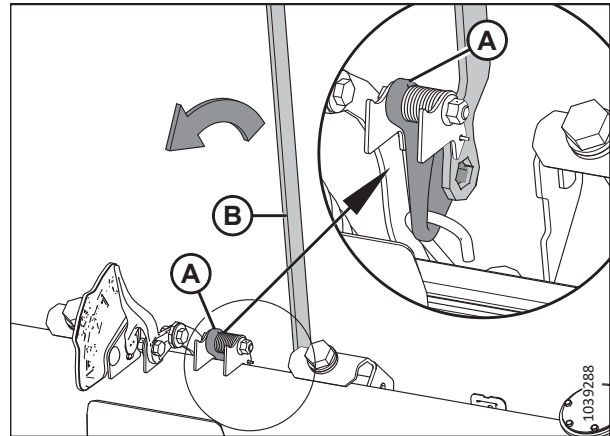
Multi-Tool Engaged with Left Float Setting Assembly
